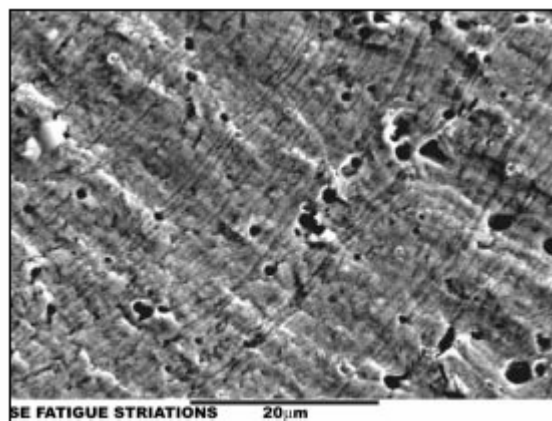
Fatigue fracture in steel highlighting the striations caused during failure (Parrington, 2002).
